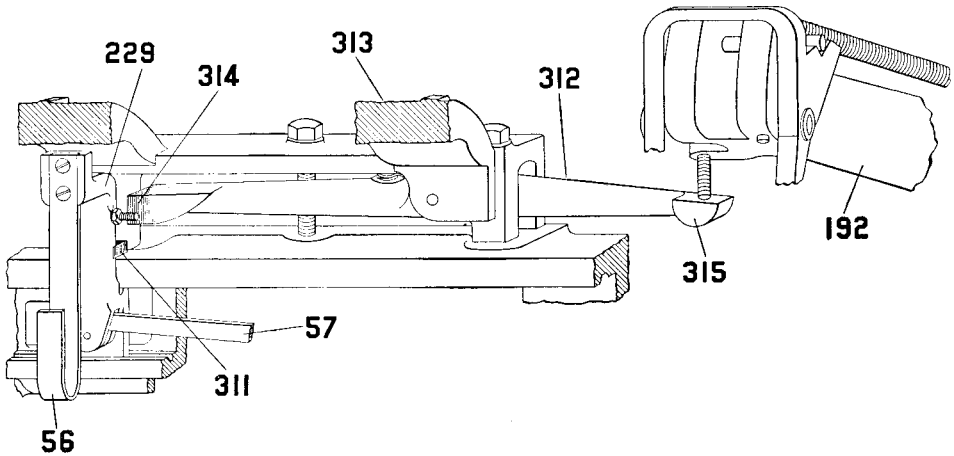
Enlarged view showing the method of locking the elevator transfer slide. When the machine is in normal position the lever 312 locks the elevator-transfer slide, but when the second elevator descends a screw strikes on the end of the lever 312 shown at 315, raises the other end of the lever 312, unlocking the elevator-transfer slide and allowing the matrices to be transferred upon the second-elevator bar.
